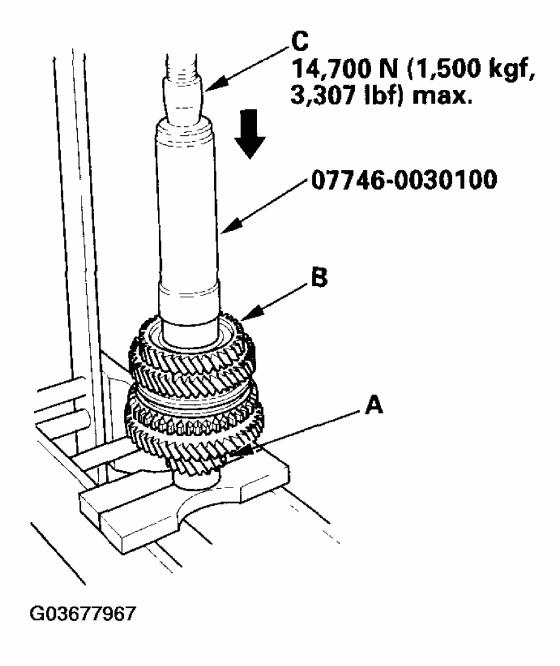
Installing Third Gear Courtesy of AMERICAN HONDA MOTOR CO., INC.
